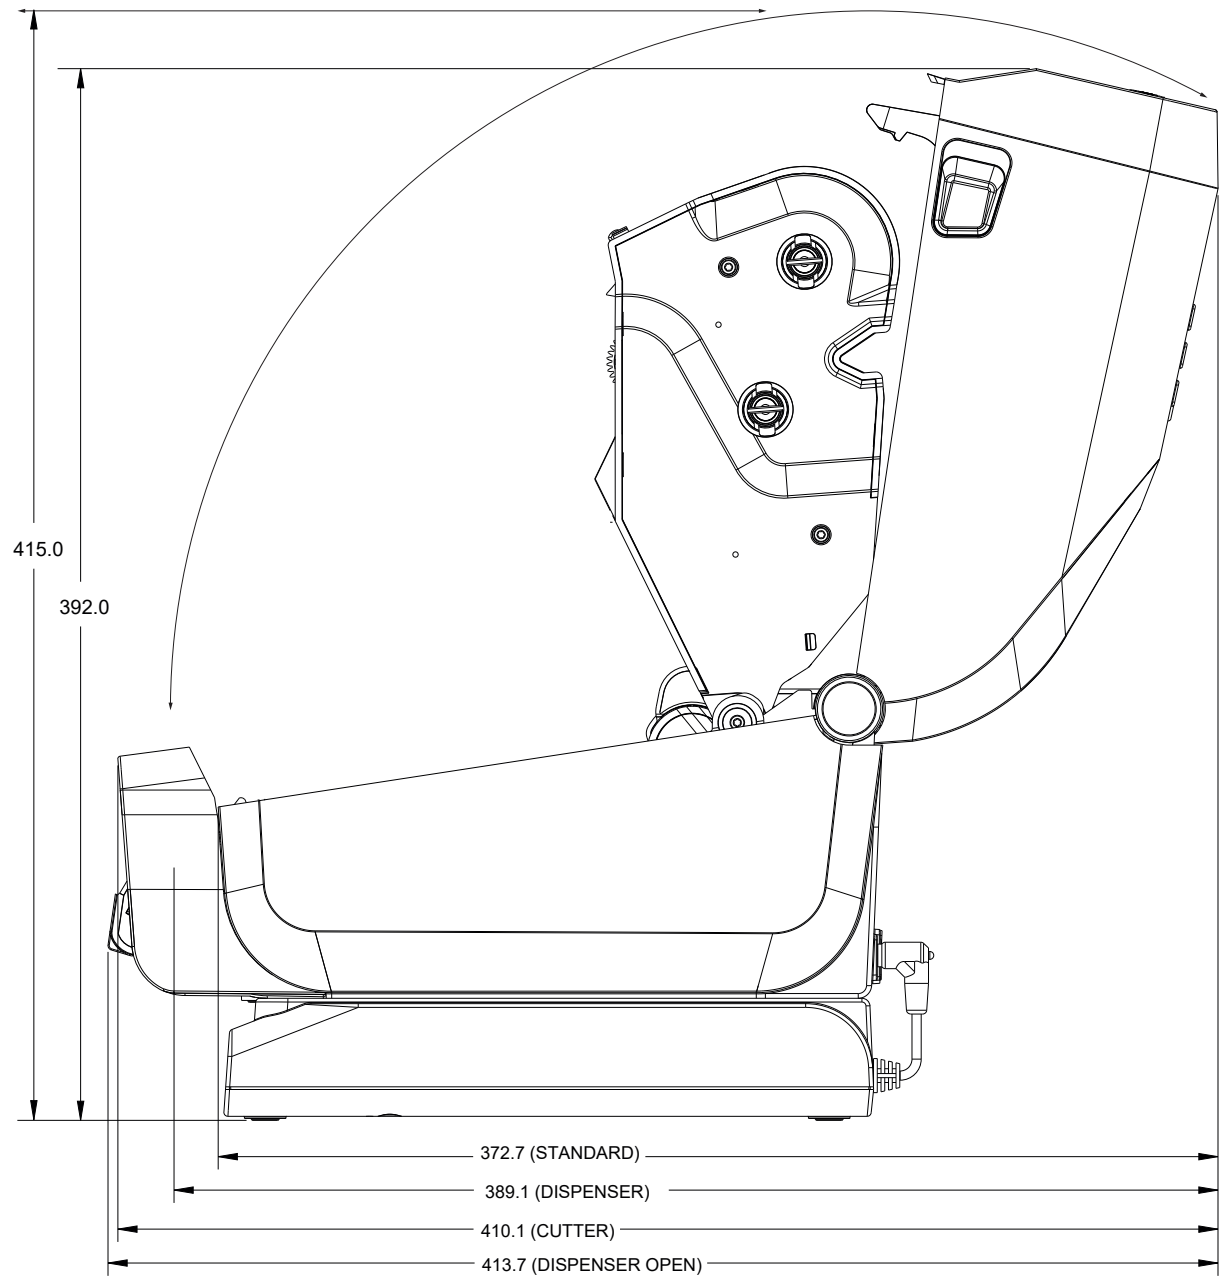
ZD421 / ZD621 Thermal Transfer Models – Dimensions for Printer with the External Battery Plugged In
